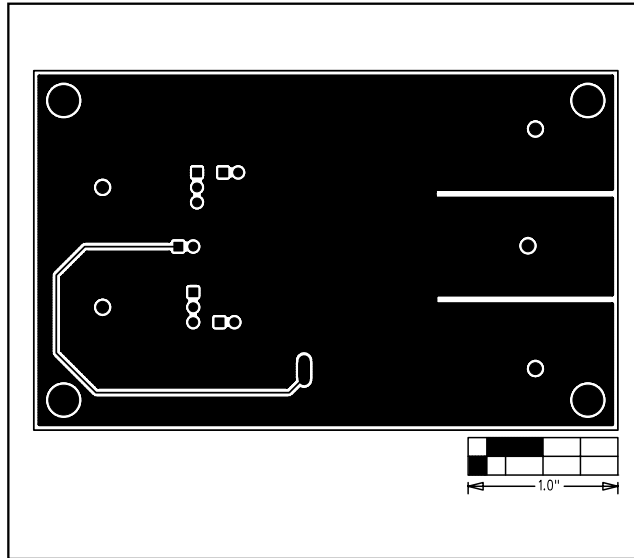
MAX7443 EV Kit PCB Layout—Solder Side
